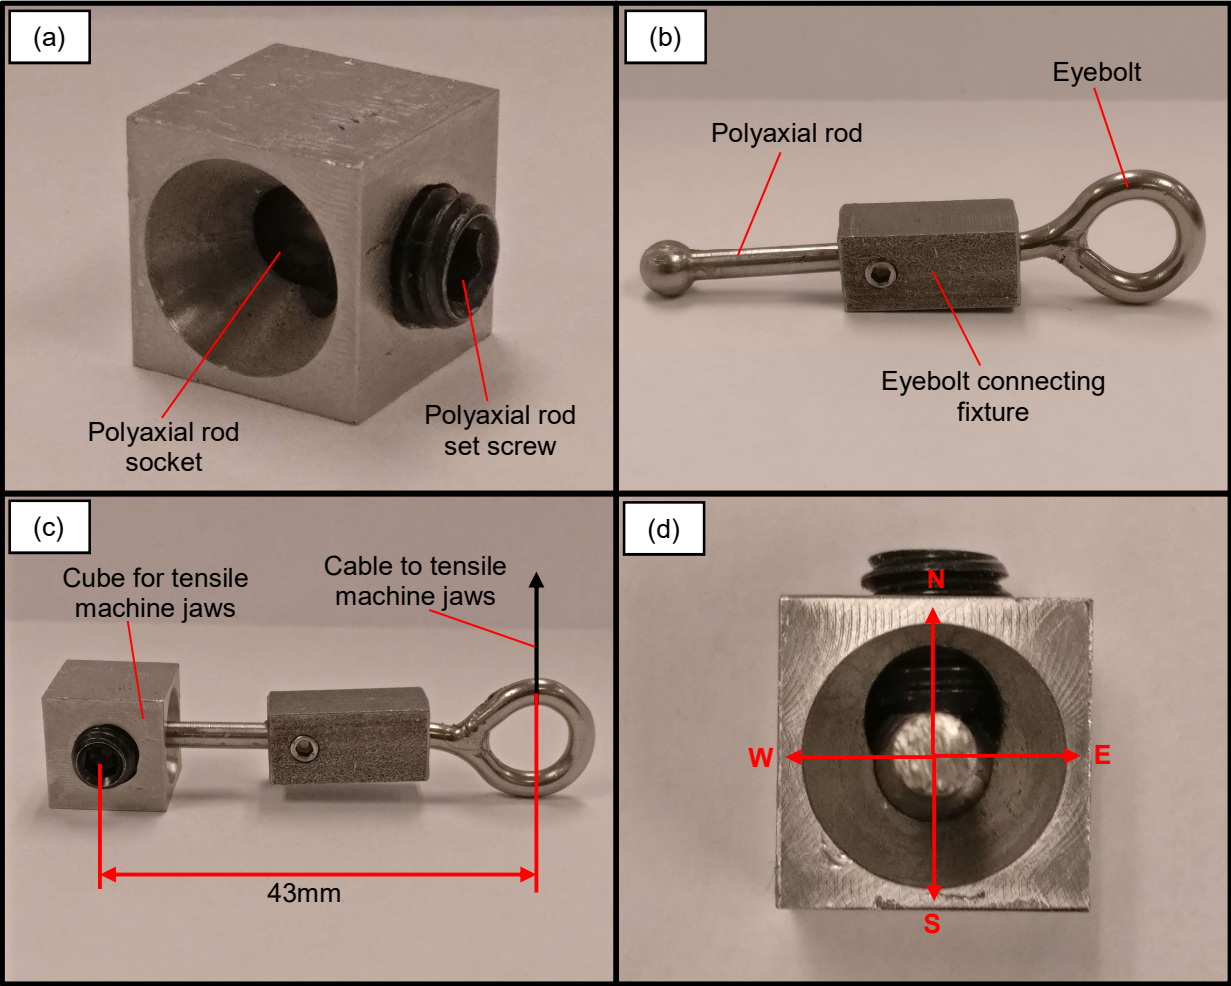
Testing apparatus for polyaxial locking screw mechanism: a) fixture to represent polyaxial rod locking mechanism, b) fixture for connecting eyebolt to polyaxial rod, c) fully assembled testing apparatus locked in place ready for tensile testing and d) directions of tensile loading
